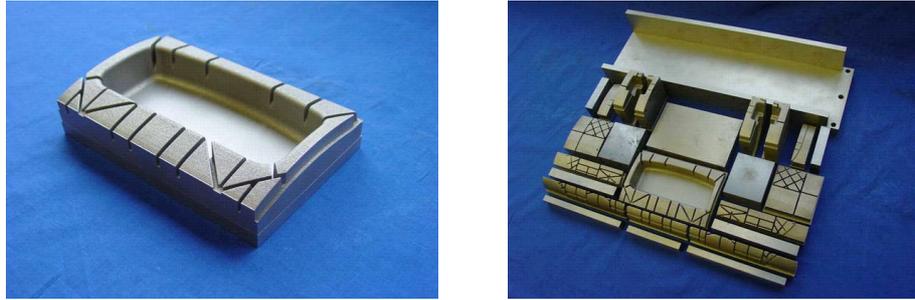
Laser sintered module (left) and modules of reference tool (right)
